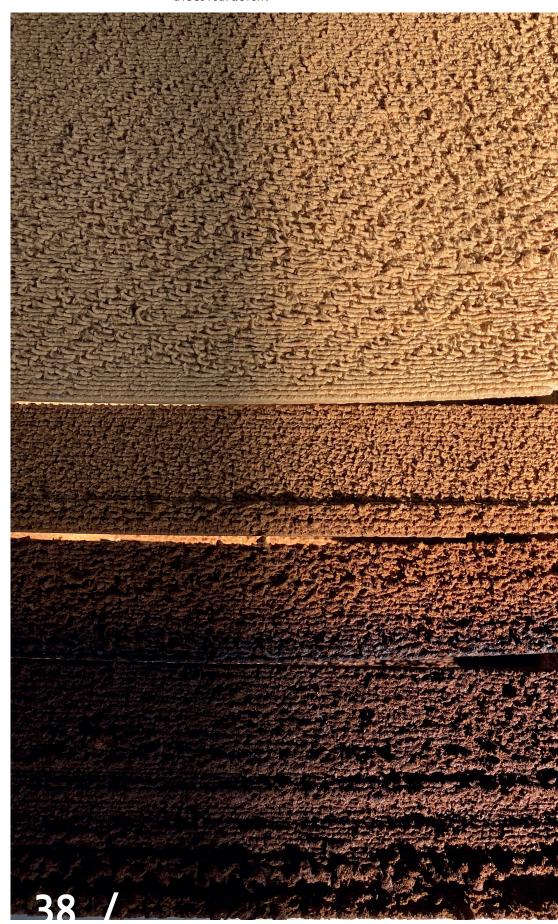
Rough Printed Surface/ ► Close up from the surface of WFPP that was printed.
